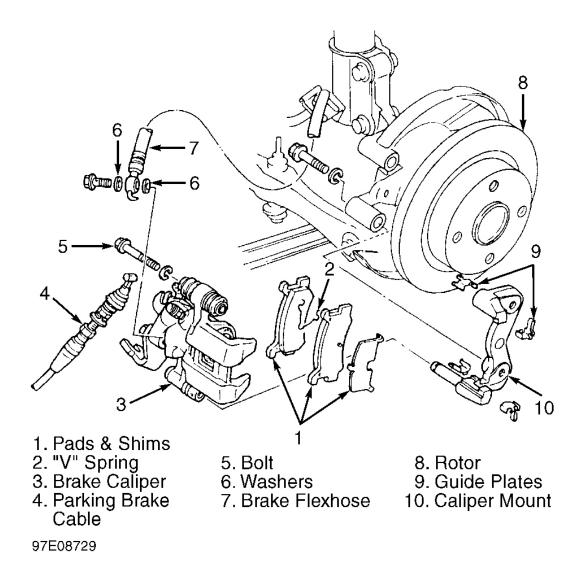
Exploded View Of Rear Disc Brake Assembly (MX-3) Courtesy of MAZDA MOTORS CORP.
